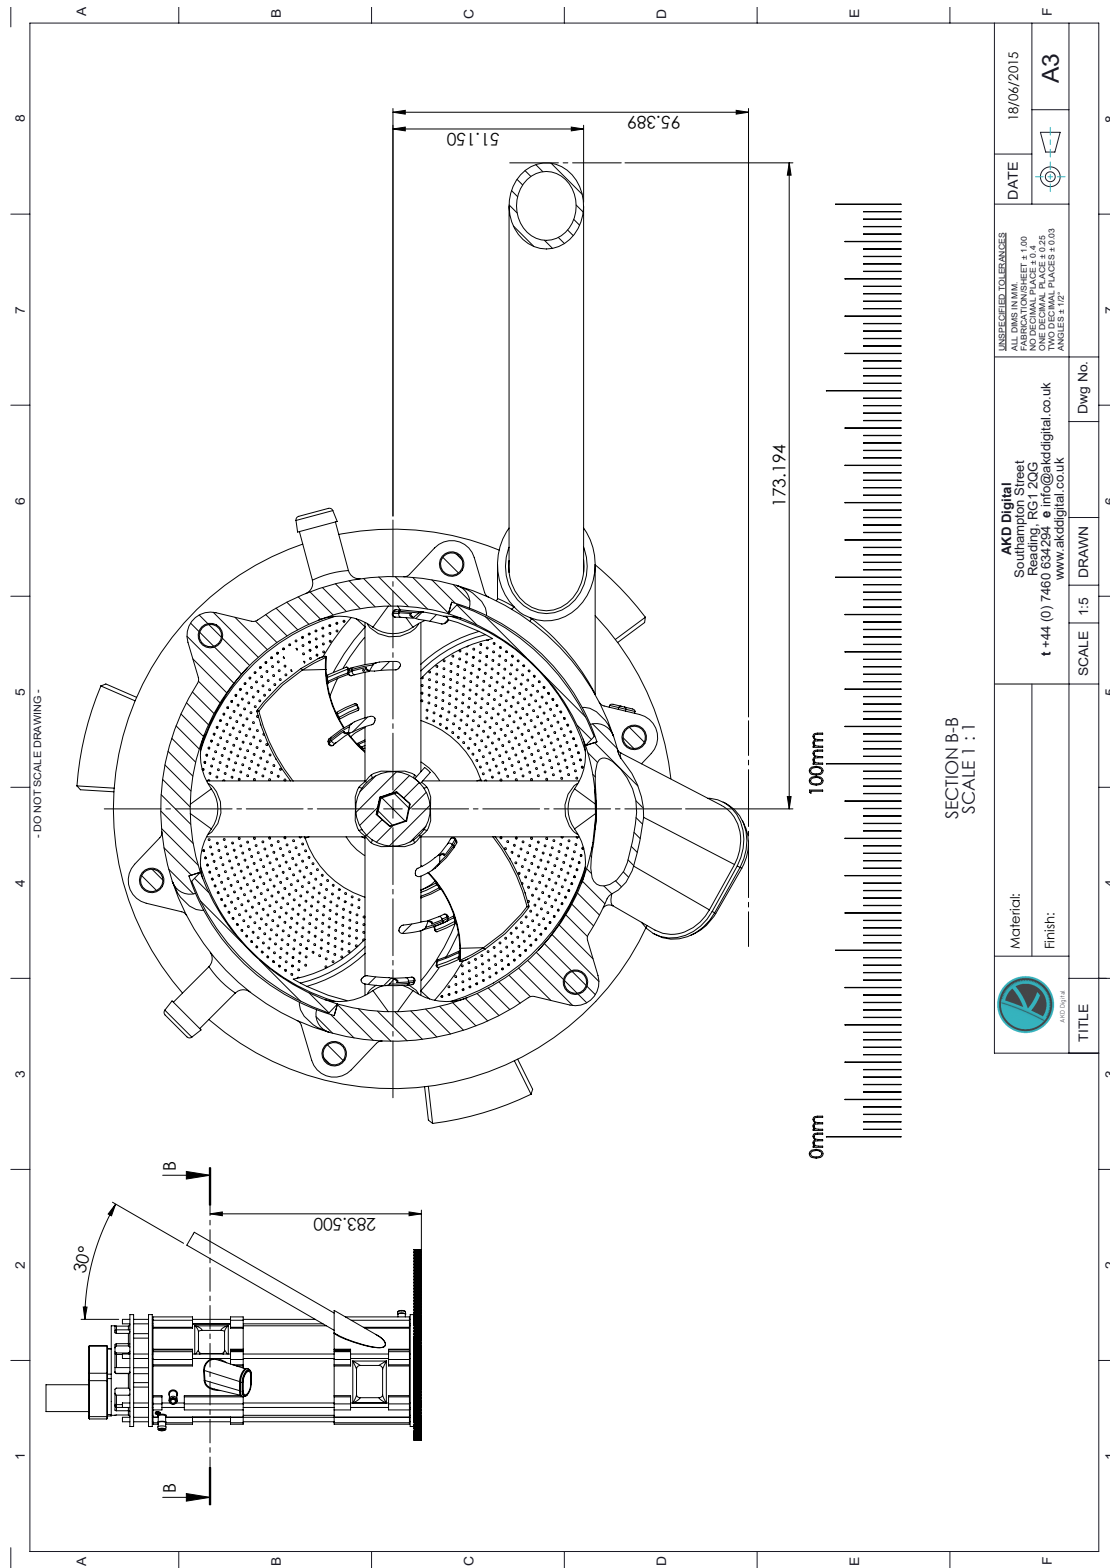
Horizontal section through the upper 3-d printed component showing viewing windows, the exit tube.
